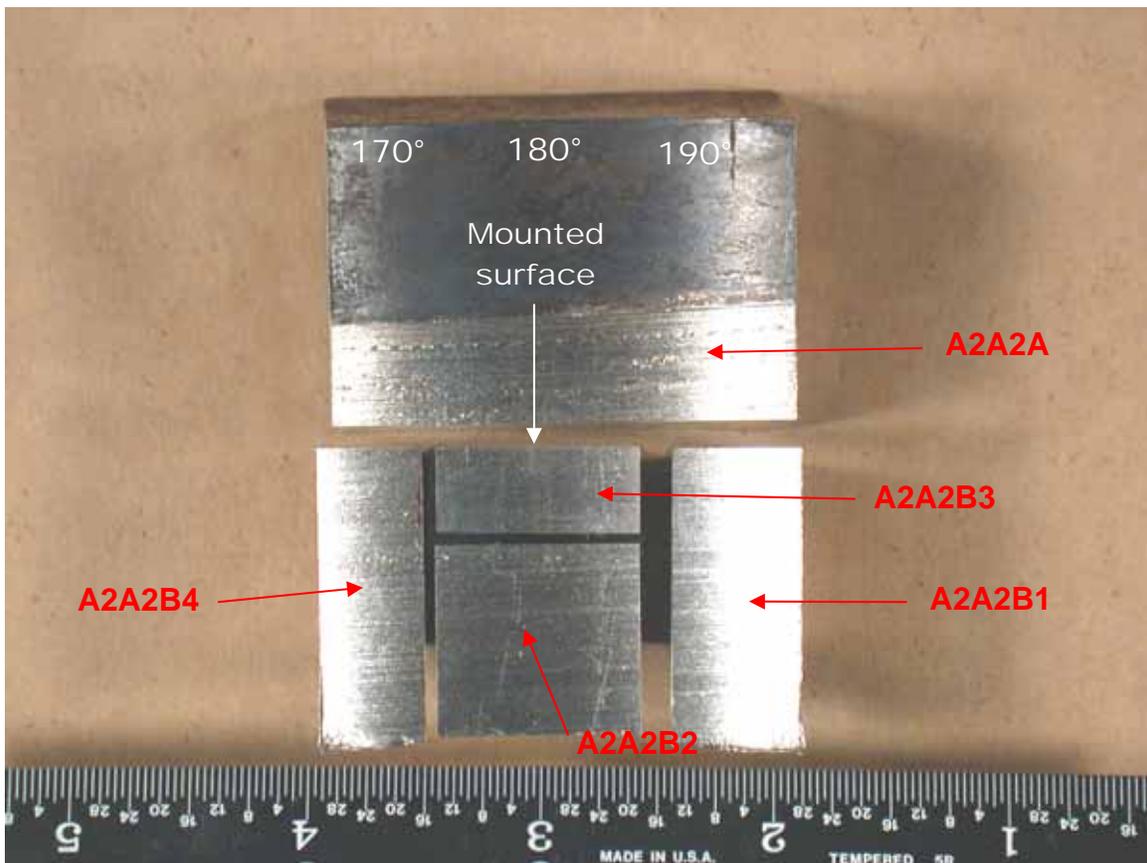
Sectioning of Piece A2A2, looking at the ID of the J-groove weld bore.
